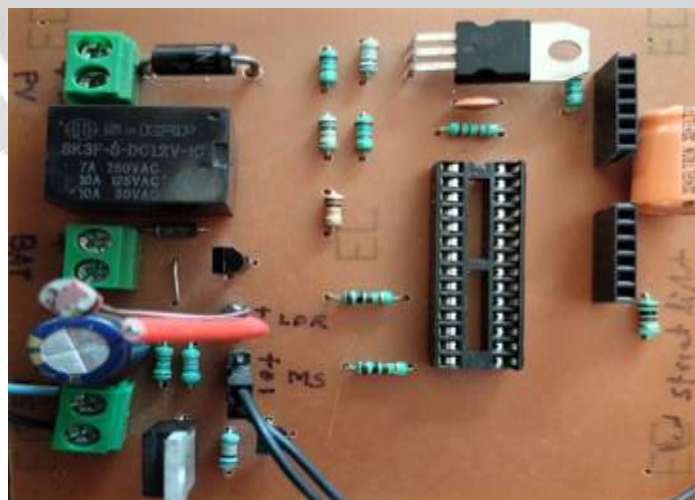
PRINTED CIRCUIT BOARD ASSMEBLY
